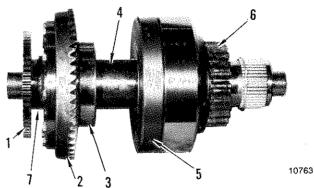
OIL CLUTCH ASSEMBLY
